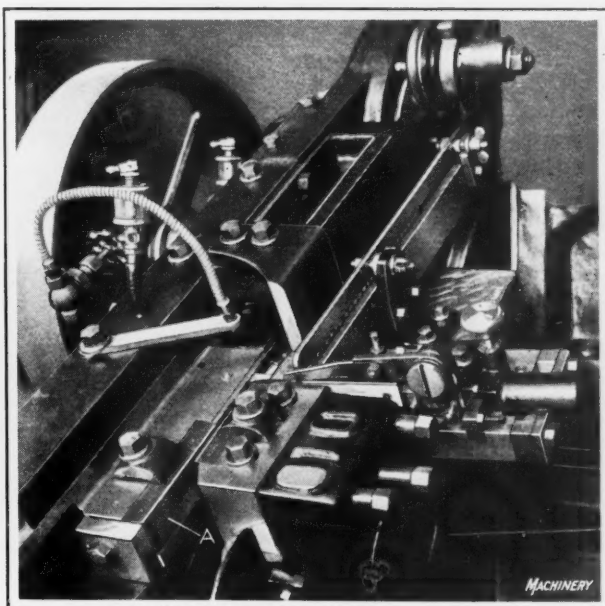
View of the Dies, Chute, Transfer Slide, etc., with which the Thread Rolling Machines are equipped
